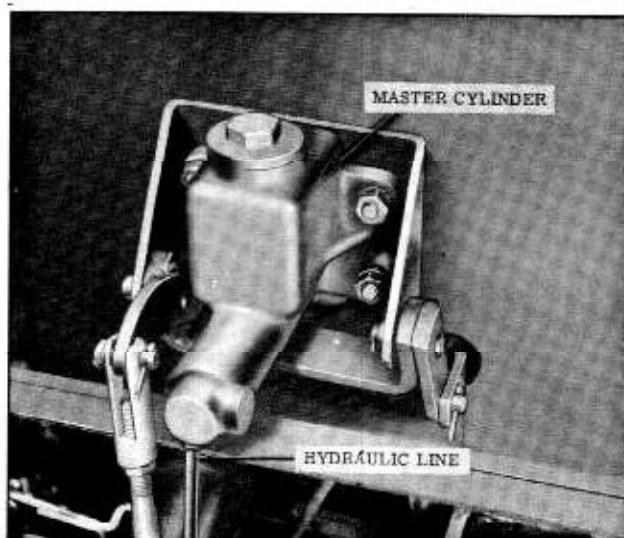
Master Cylinder Attachment (Standard Brake)
